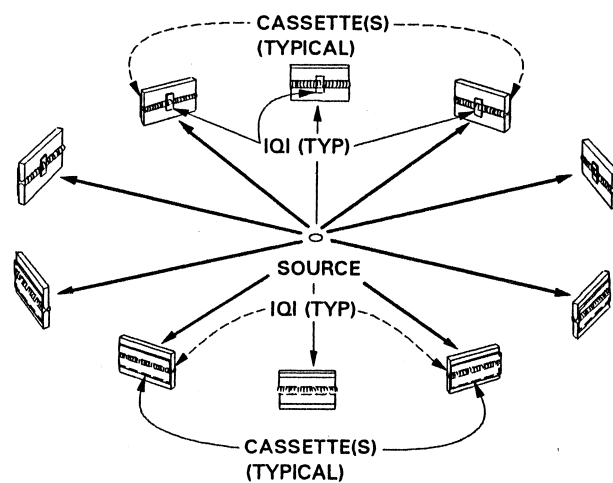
WELDS IN SEGMENTS OF
